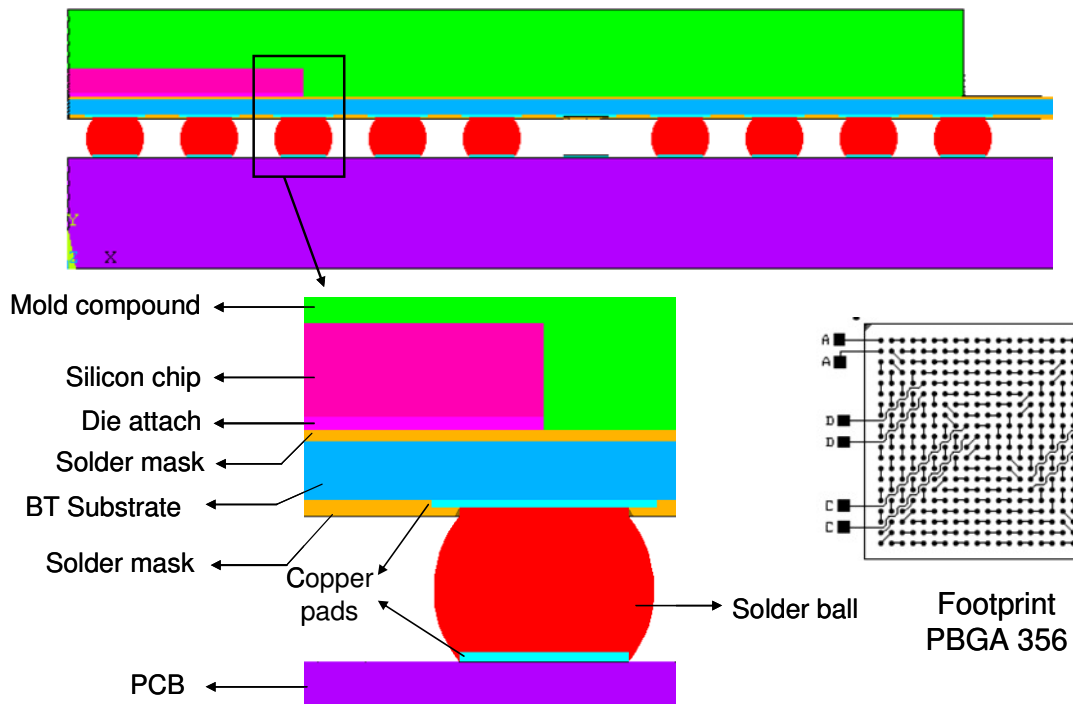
Cross-section along the centerline and footprint of the PBGA 356 package
